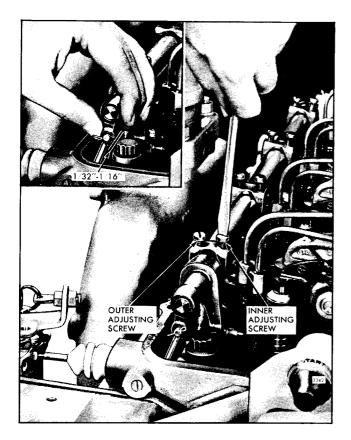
Adjusting Injector Rack Adjusting Screws
